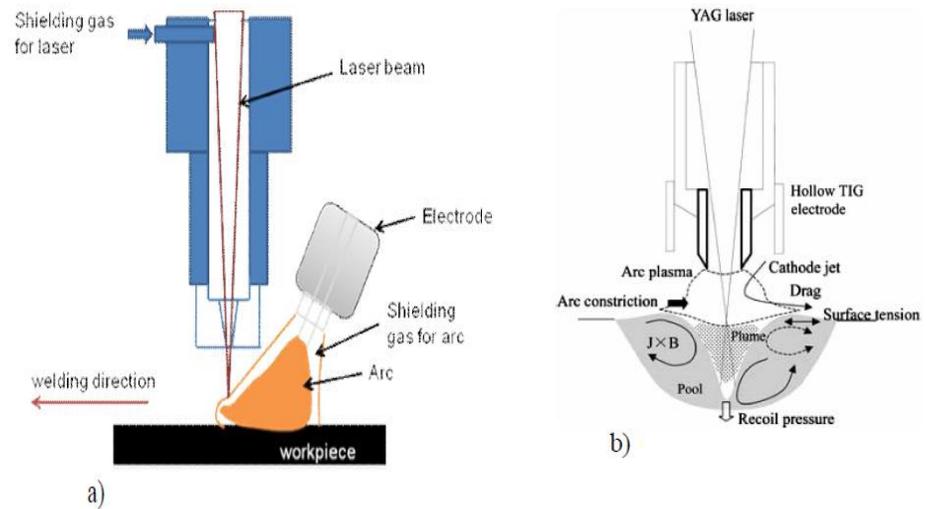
Schematic illustrations: a) Sketch of laser-arc hybrid welding, Ar shielding gas supplied to the laser and TIG arc b) coaxial hybrid process with hollow TIG and laser, redrawn from [126, 127]
